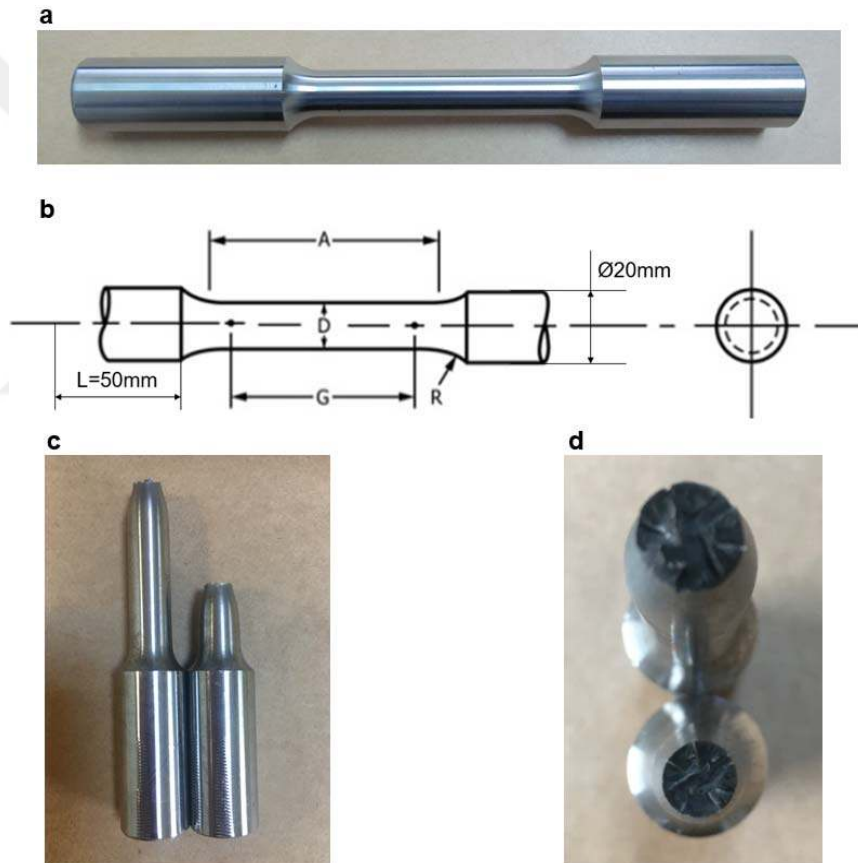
Photos and schematic of technical drawing tensile specimen; a) Machined, b) Technical drawing G—Gage length ($62,5 \pm 0,1 \text{ mm}$), D—Diameter ($12,5 \pm 0,2 \text{ mm}$), R—Radius of fillet (10 mm), A—Length of reduced section (75 mm), c) Front view of broken tensile specimen, d) Broken surfaces of tensile specimen
